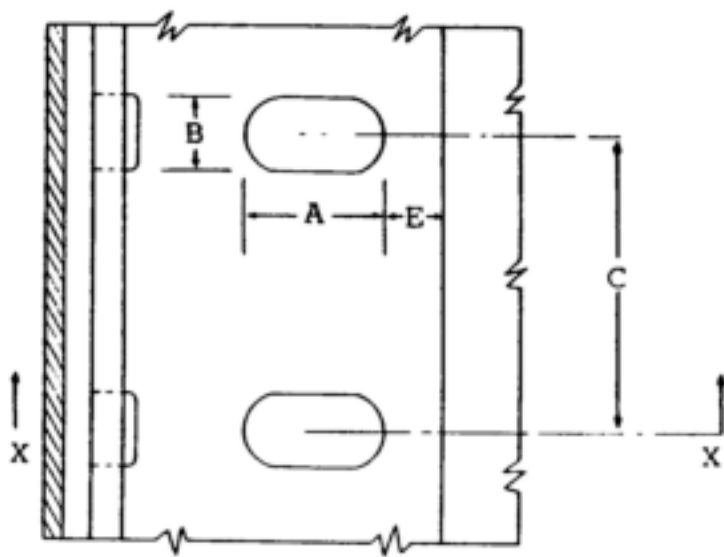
Butt strap weld on face hardened armor.
